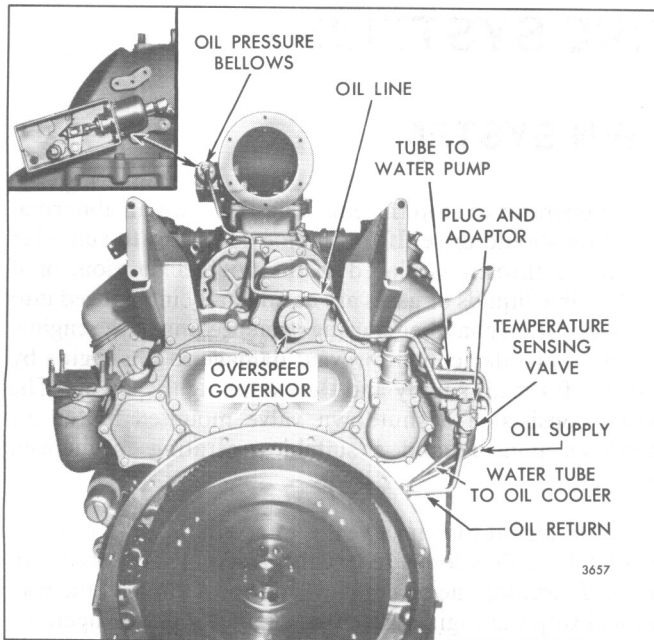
Typical Automatic Mechanical Shutdown System Mounting
